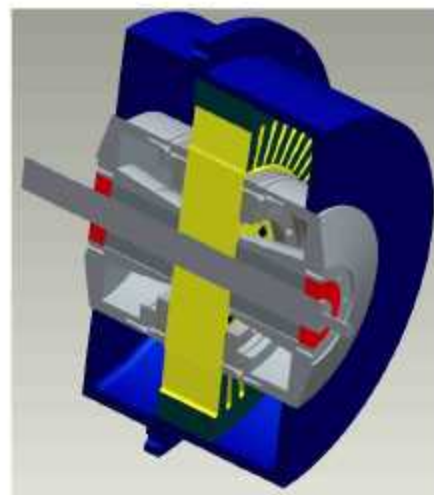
Assembly of ORNL 16,000-rpm motor design.
